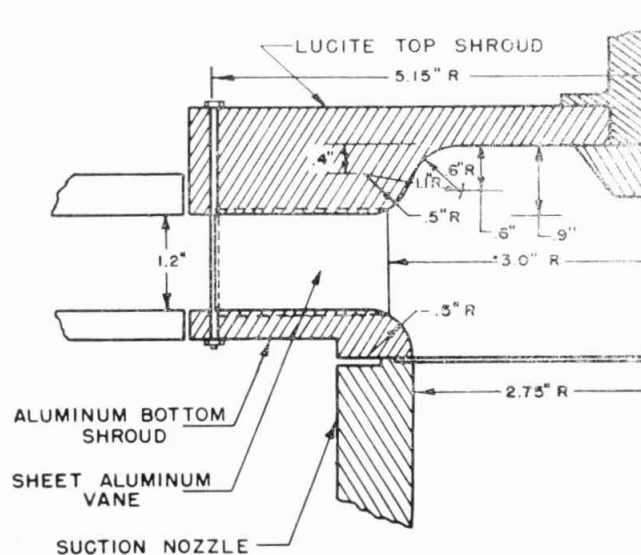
CROSS SECTION OF TWO-DIMENSIONAL IMPELLER
